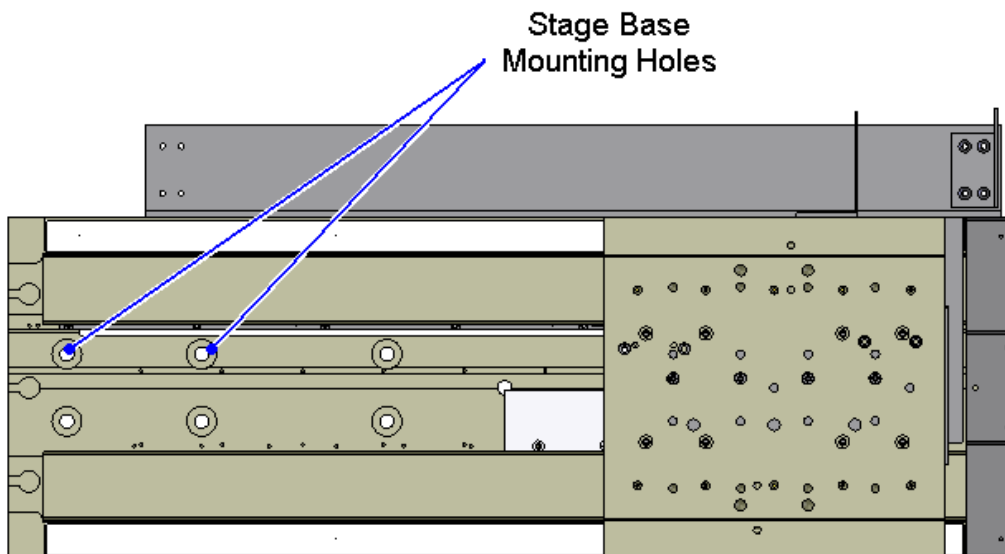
With Magnet Tracks Removed, Stage Mounting Holes are Accessible
